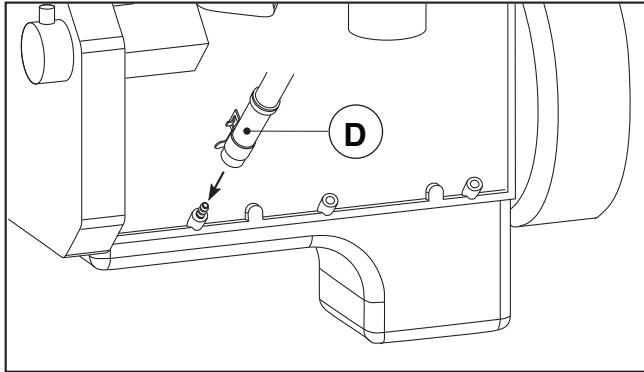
Attaching the Drain Hose to the Insert Fitting
